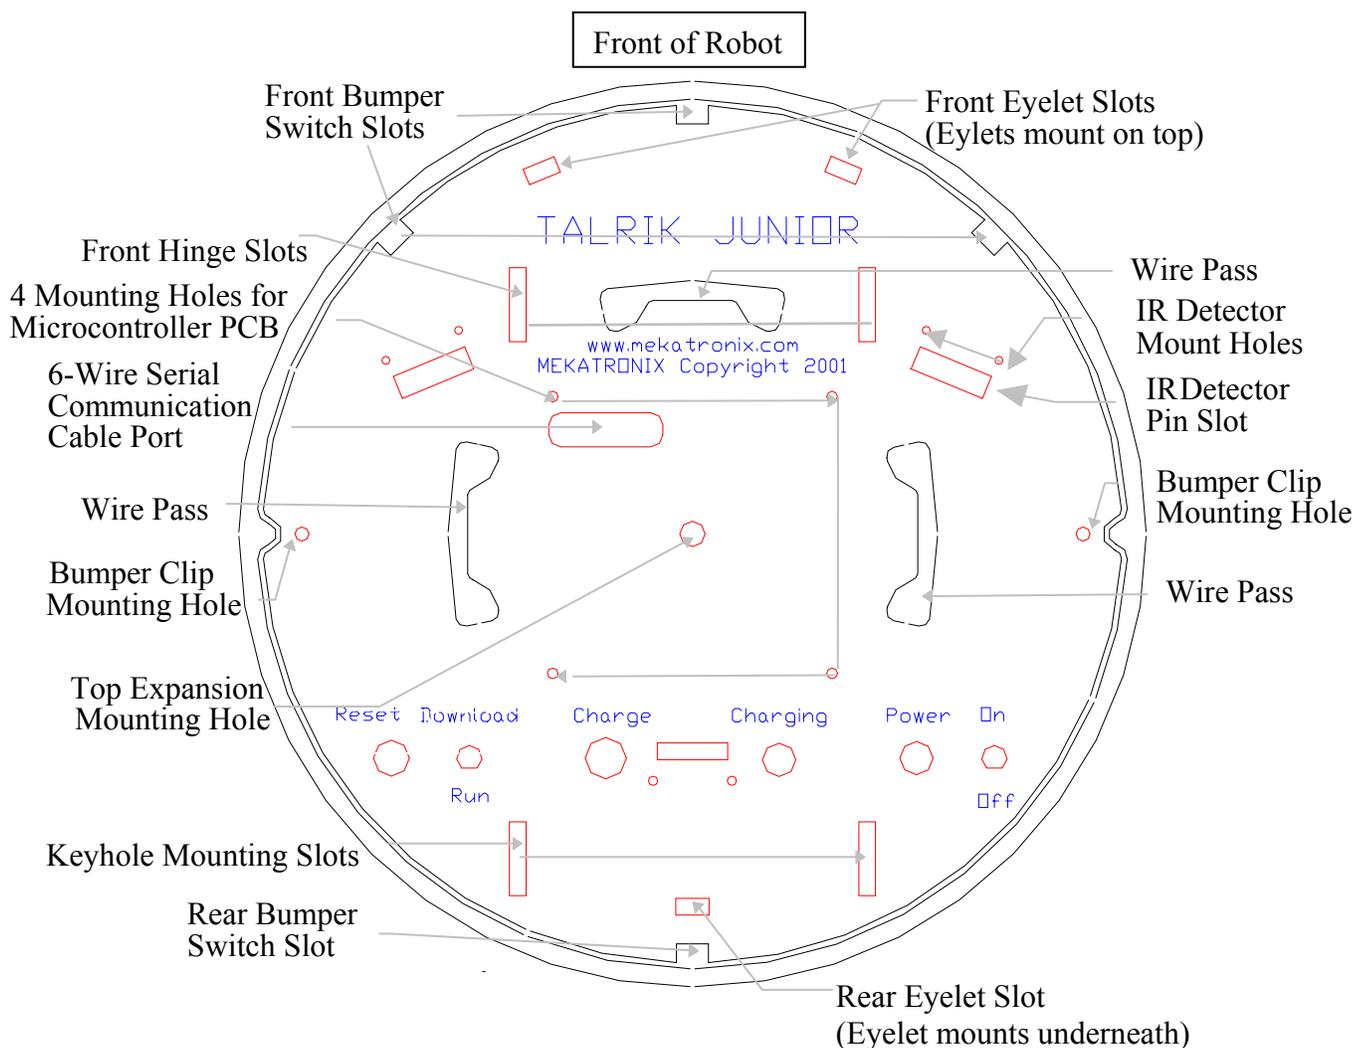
Layout of TJ-AVR™'s Top Plate. The three wire pass cutouts are parts (TJBGUIDE10). Do not throw away!
